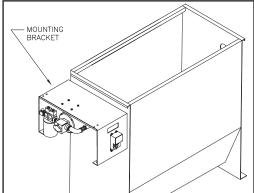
& 7b: Installation of mounting bracket directly to power units.
